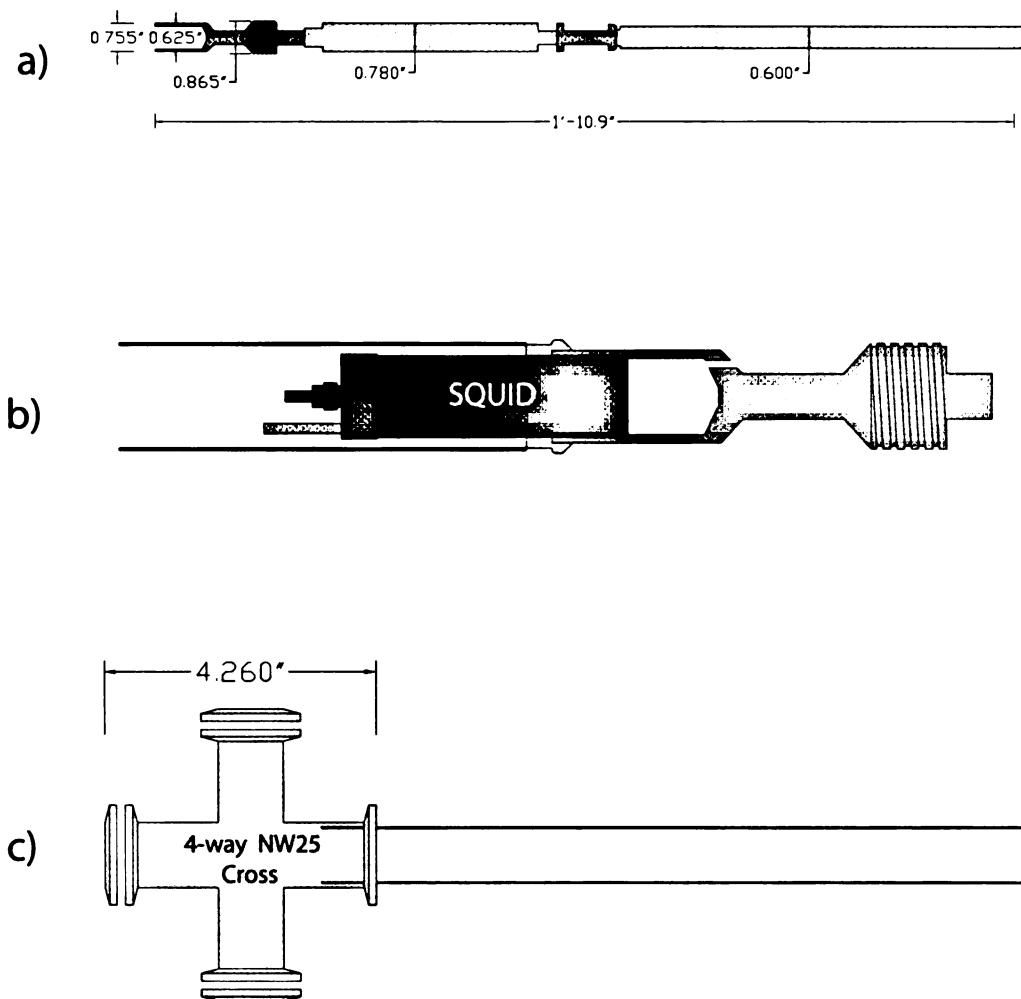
a) Lower probe dimensions. b) SQUID mounting and connection between lower probe and stainless steel tubing. The wires of the SQUID are directed up the probe. c) Top of the probe made of a 4-way NW25 cross and blanks. Vacuum-compatible connectors can be attached to the NW25 blanks using epoxy.
